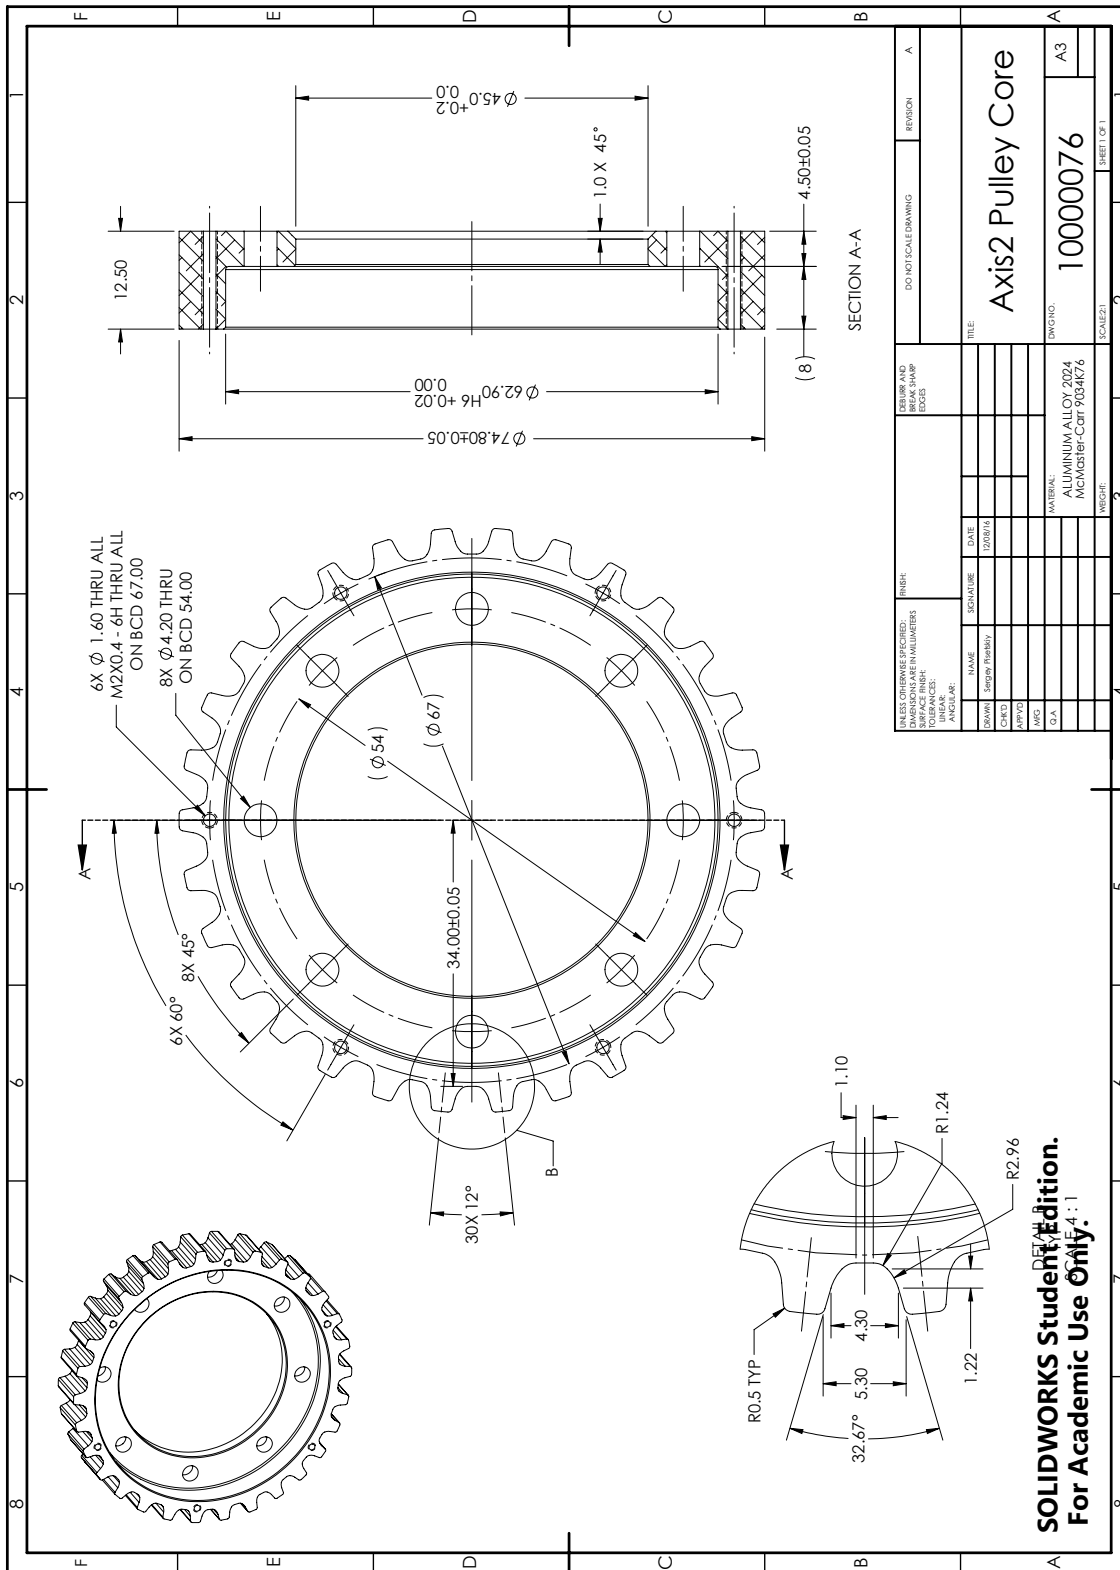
Drawing: Joint 2 timing belt pulley core.
